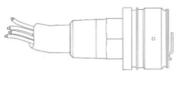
Drawing of a 057-077* Electrical Snap-Switch
